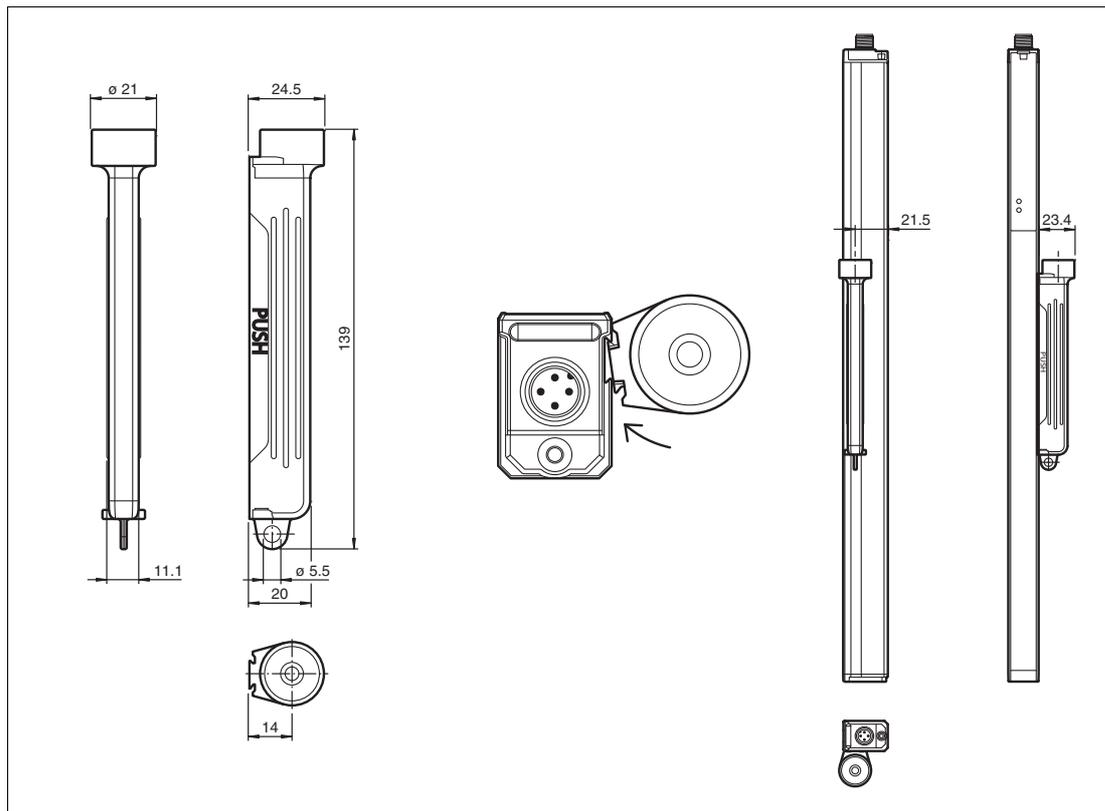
Dimensional drawing and assembly of the alignment AA-SLCT-01
